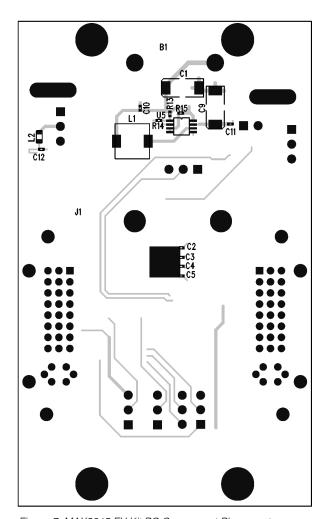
MAX3815 EV Kit PC Component Placement Guide—Solder Side
